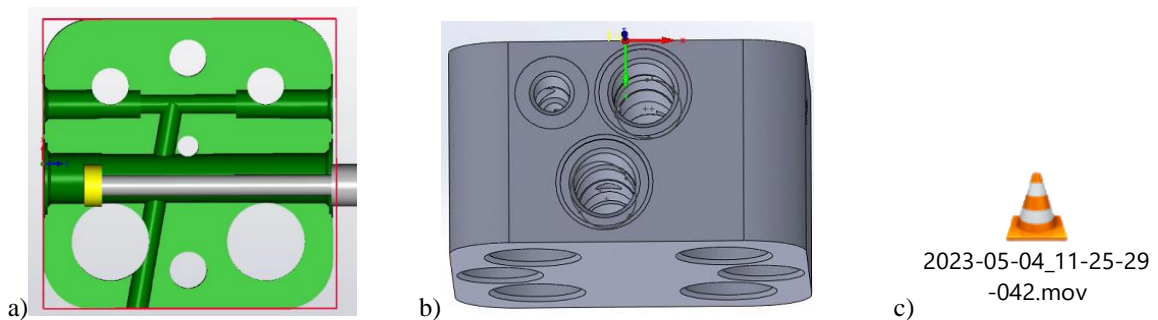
, a, b, c. Simulation elements of machining with a side mill of eccentric channels
